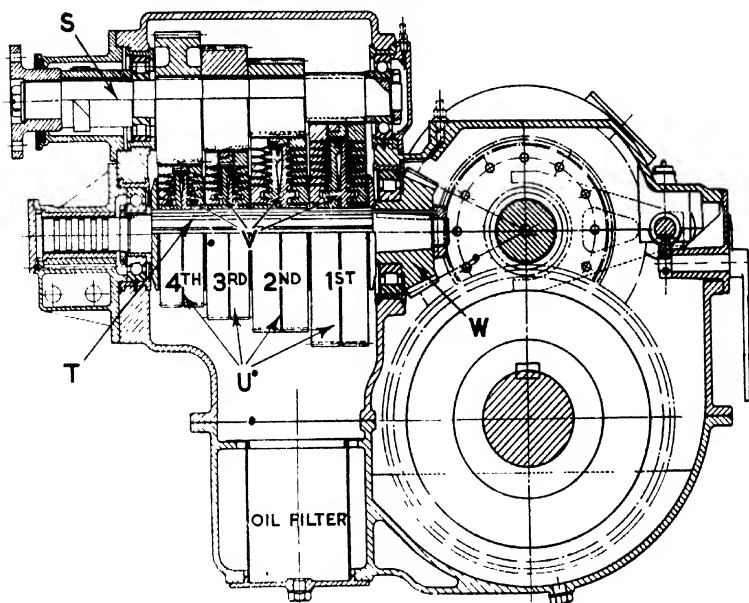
SECTIONAL VIEW OF GEARBOX FITTED TO THE RUSTON MEDIUM-WEIGHT LOCOMOTIVE
